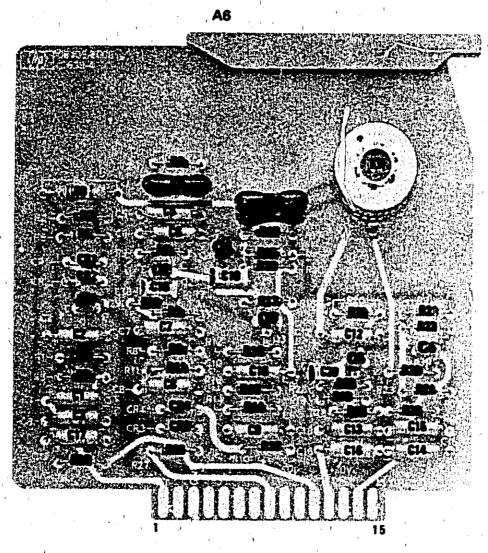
A. A6 180 Degree Switch Assembly Component Identification (ERRATA)
